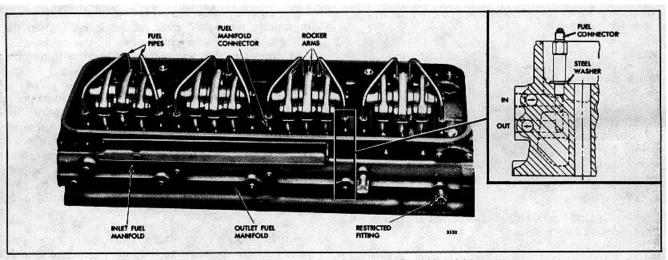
Cylinder Head with Integral Fuel Manifolds
